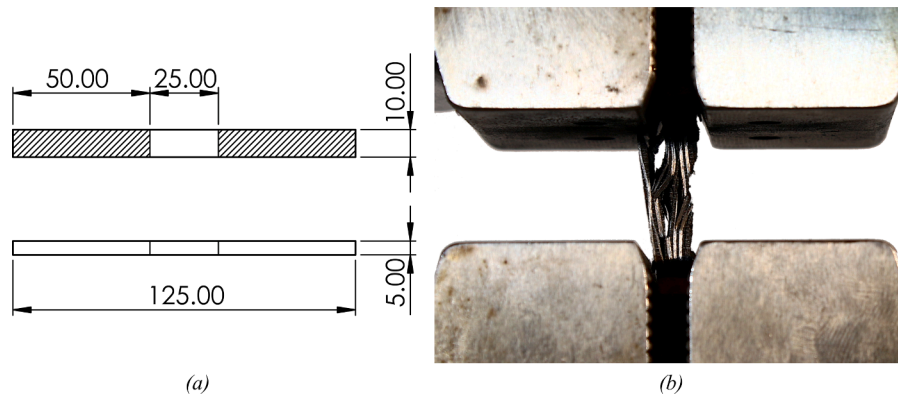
(a) Compressive specimen geometry and (b) typical failure observed in the compression tests.
